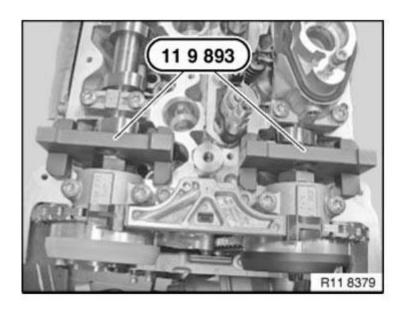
Blocking Exhaust Camshaft Using Special Tool 11 9 893 Courtesy of BMW OF NORTH AMERICA, INC.
